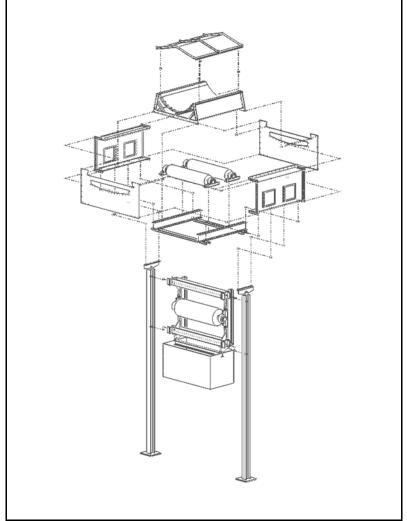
Exploded View of Typical Vertical Gravity Take-Up (Belt not shown for clarity)
